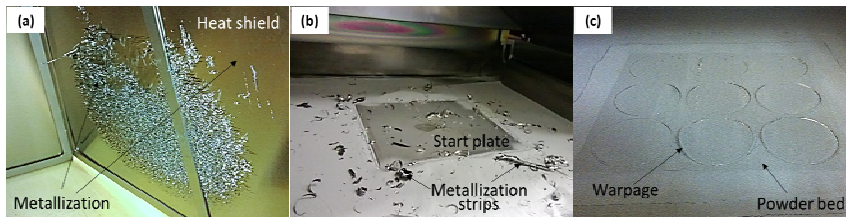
(a) Two kinds of metallization formed on the inner surface of heat shield. (b) Plenty of metallization strips peel off onto the start plate and powder table. (c) Warpage of some building parts.
